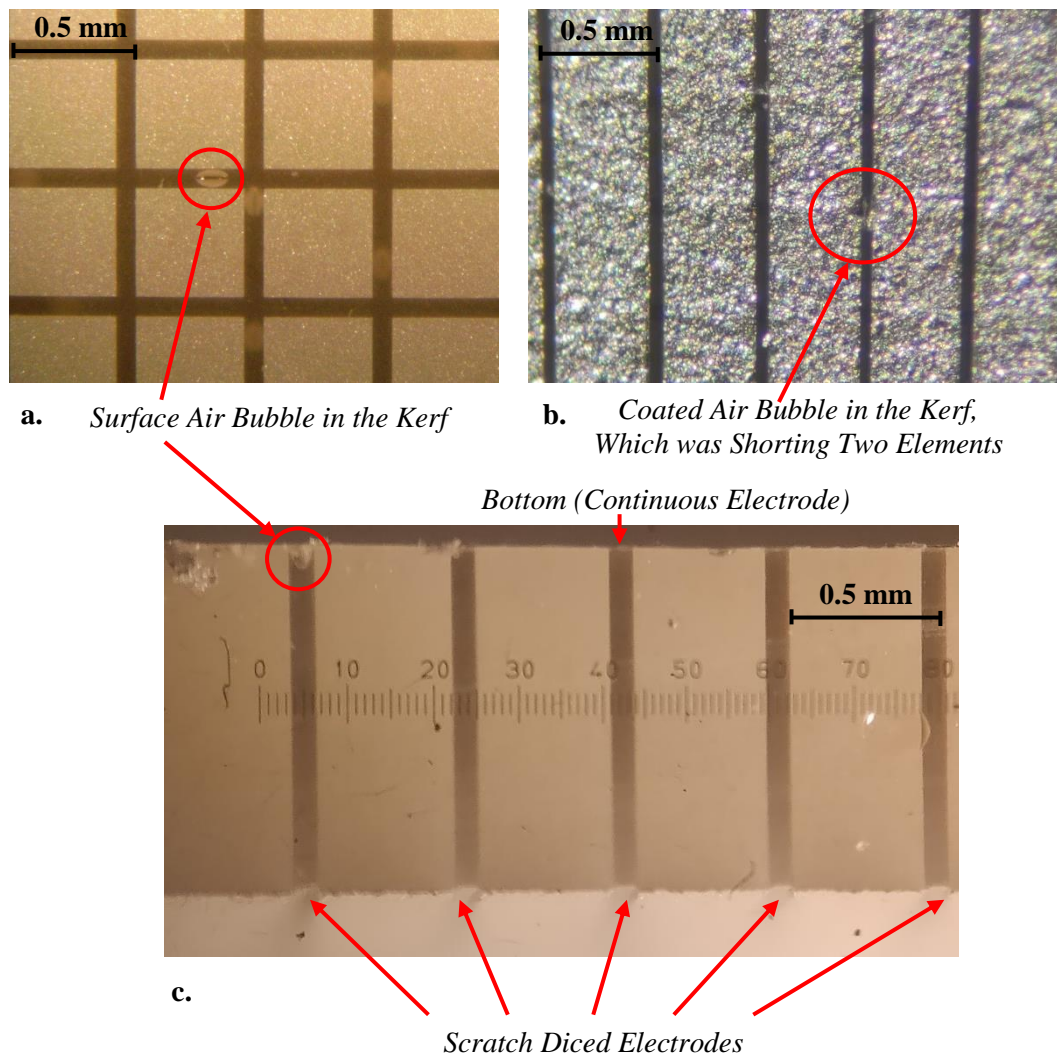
Inter-element Short Circuit Produced by a Coated Surface Air Bubble in the Kerf Filler: a. Surface Air Bubble in the Unelectroded Piezocomposite (Top View); b. Air Bubble Coated with Ag Ink (Top View); c. Bubble Protrusion in Side View
